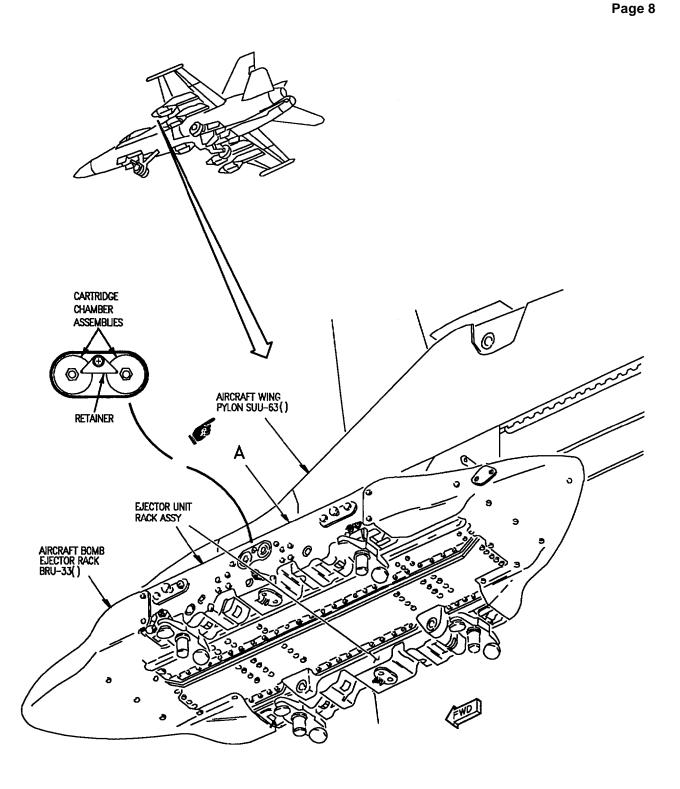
Mechanical Fuzing, BRU-33/( ) Arming Units (Sheet 1)
